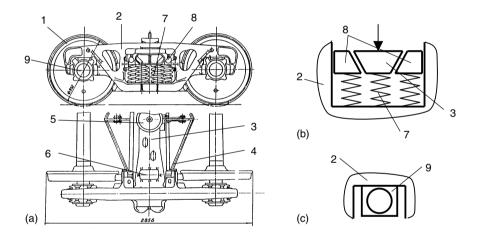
Type 18-100 bogie: (a) general view; (b) central suspension scheme; (c) primary "suspension" scheme (1, wheelset; 2, side frame; 3, bolster; 4, braking leverage; 5, centre bowl; 6, rigid side bearings; 7, suspension springs; 8, friction wedge; 9, axlebox).
